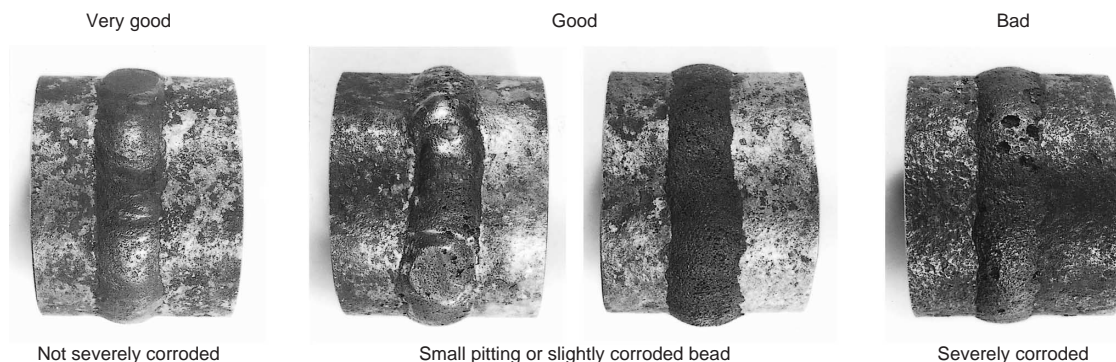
The judgment standard for corrosion at the weld metals.
